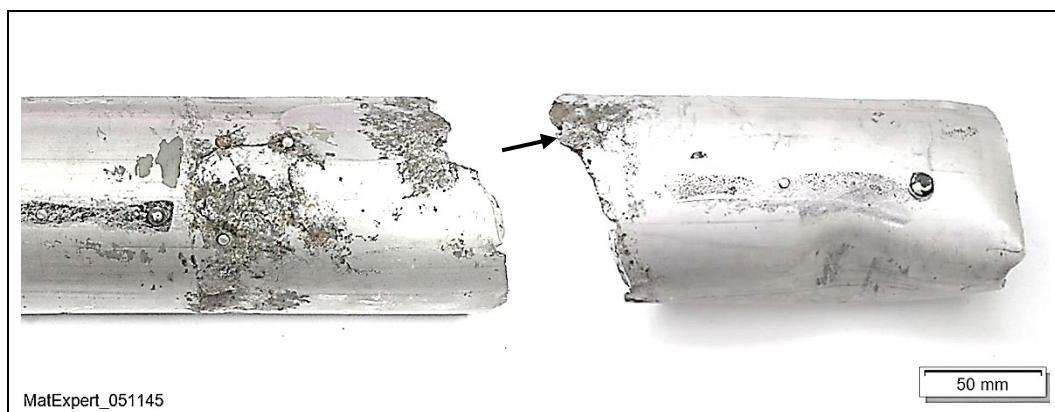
Overview of the broken spar section; approximately 10 % of the fracture surface (arrow) is accounted for by fatigue fracture.
